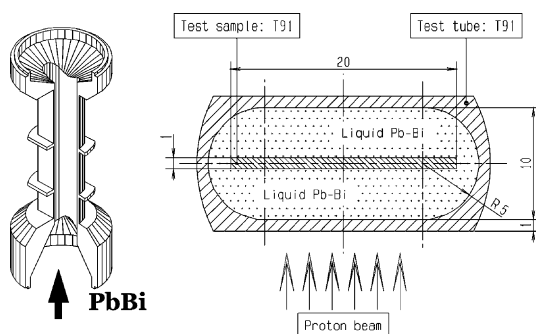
Sketches showing the tube of the LiSoR test section and the cross-section of the tube including the test specimen. The dimensions are in millimeters.
